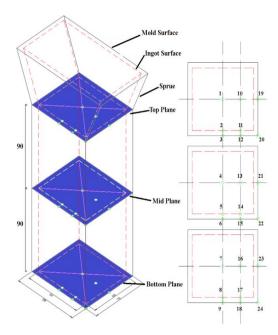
Dimensional drawing of ingot cast, shown with 24 different locations selected.
